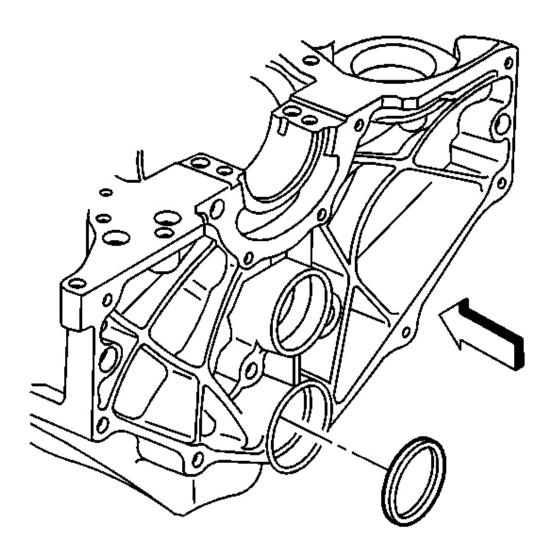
View Of Balance Shaft Rear Bearing Hole Expansion Cup Plug Courtesy of GENERAL MOTORS CORP.
